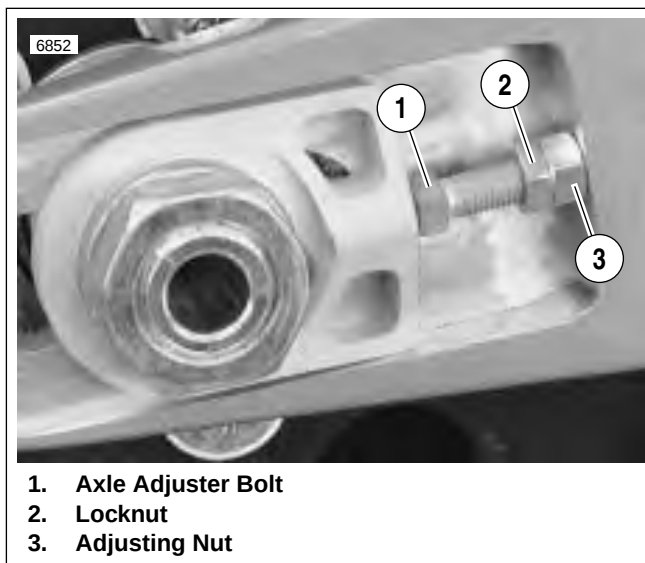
Axle Adjuster Bolt, Right Side Shown
